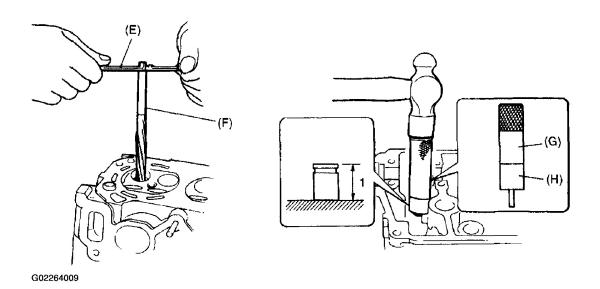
Reaming Valve Guide & Checking Installed Height Courtesy of SUZUKI OF AMERICA CORP.
